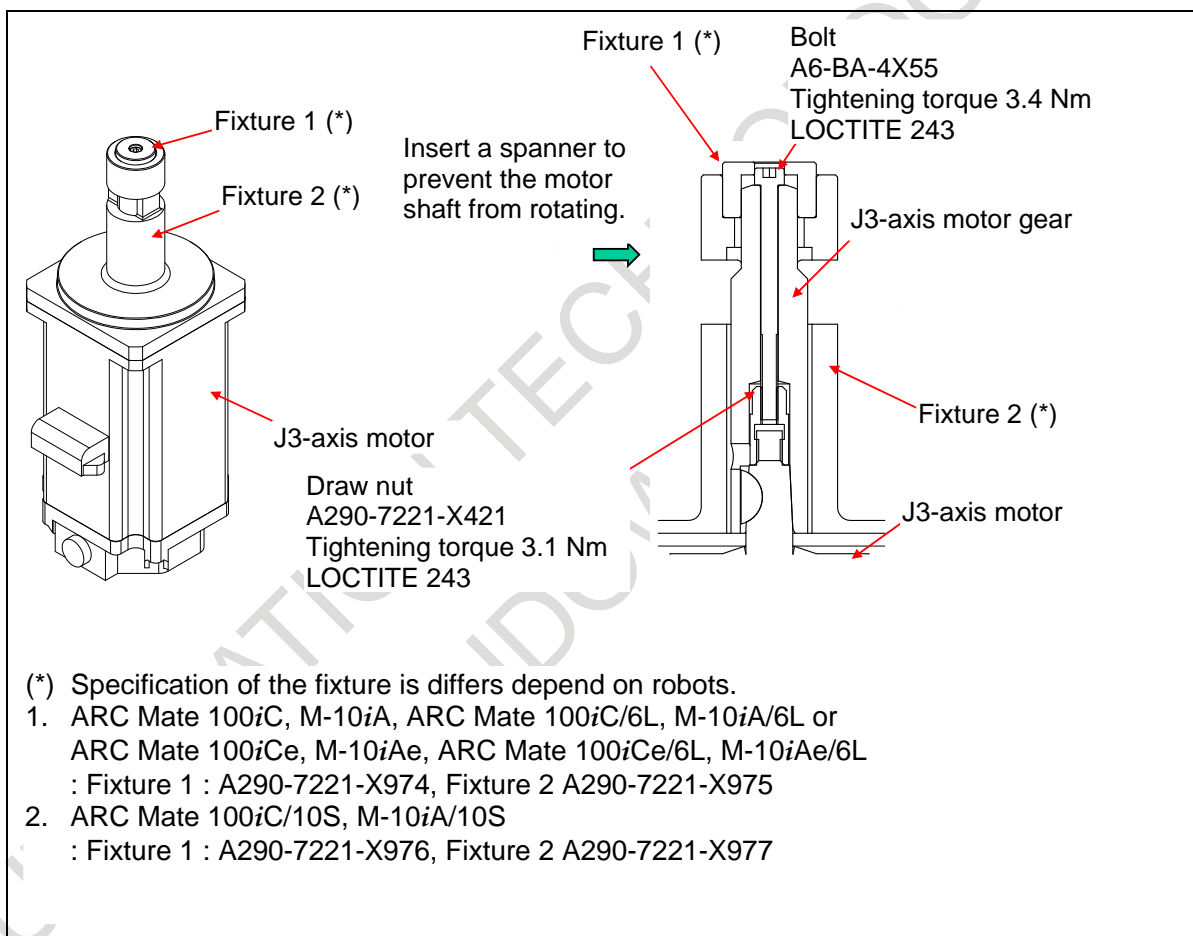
(a) Attaching the gear on the J3-axis motor
